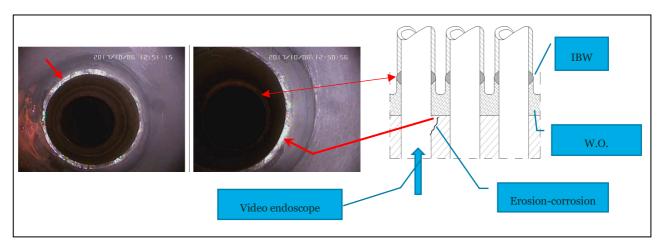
Video endoscope image of a hole in tube sheet, showing small erosion-corrosion damages (increase hole size) of carbon steel just behind the stainless steel weld overlay
